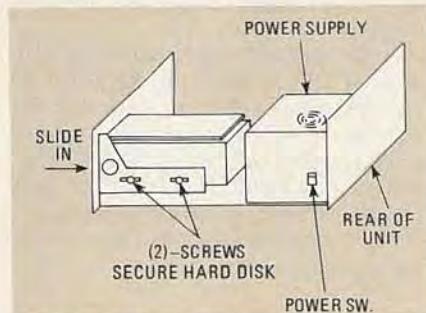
MOUNTING THE HARD DISK and power supply is straightforward.
